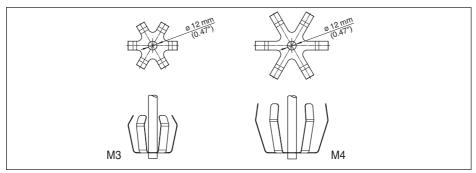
Spacers of metal for rod versions with ø 12 mm (0.47 in)
